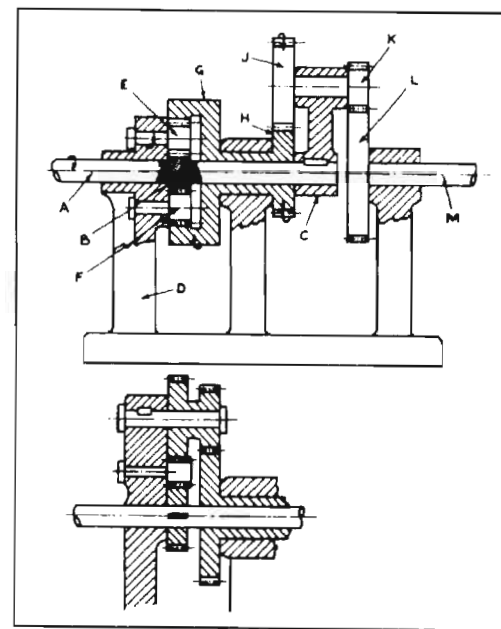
(Top) Planetary gear type indexing device that provides fixed dwell periods in the movement of follower-shaft *M*. (Bottom) Alternate gear arrangement permits the elimination of internal gear *G*.
